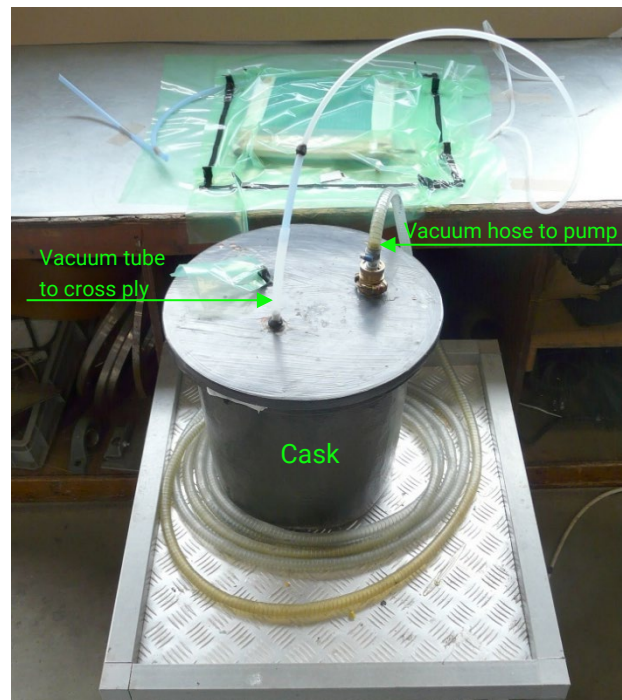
vacuum tube (inlet) connected to the cask of the vacuum pump.
